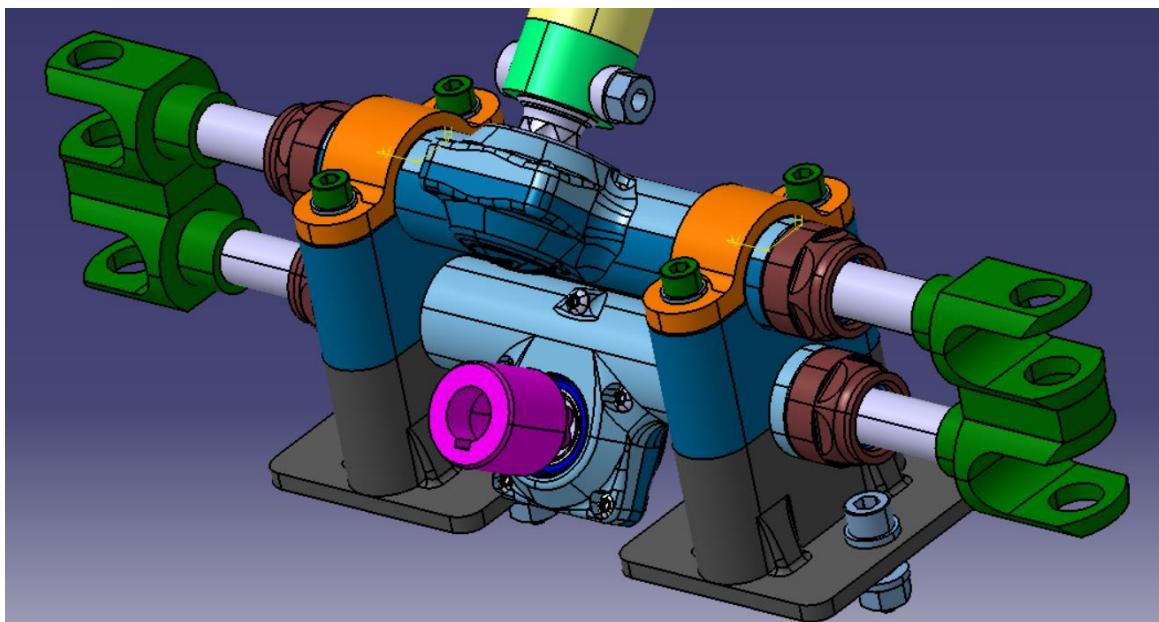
Modified steering rack assembly for ASS - Solution 5
